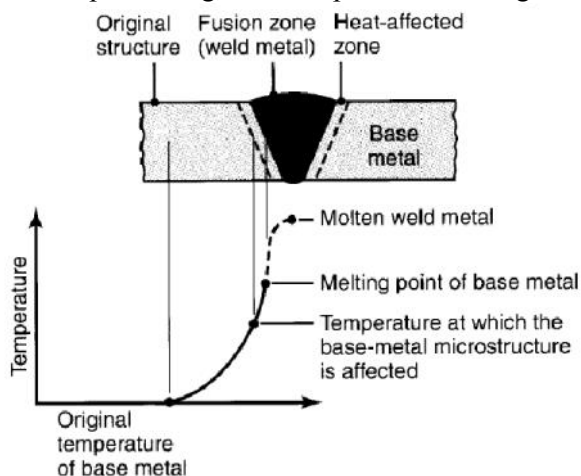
FIGURE Characteristics of a typical welded zone in oxy fuel gas and arc welding
